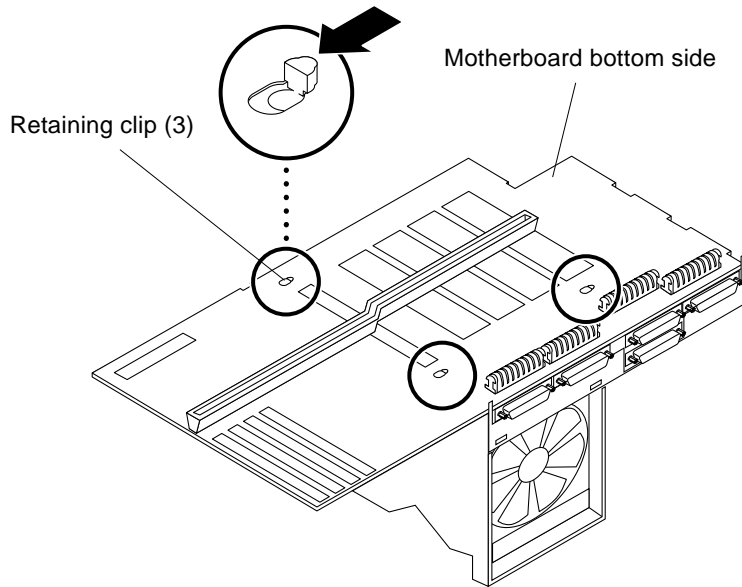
Removing and Replacing the One-Piece Shroud Assembly (Part 2 of 2)
